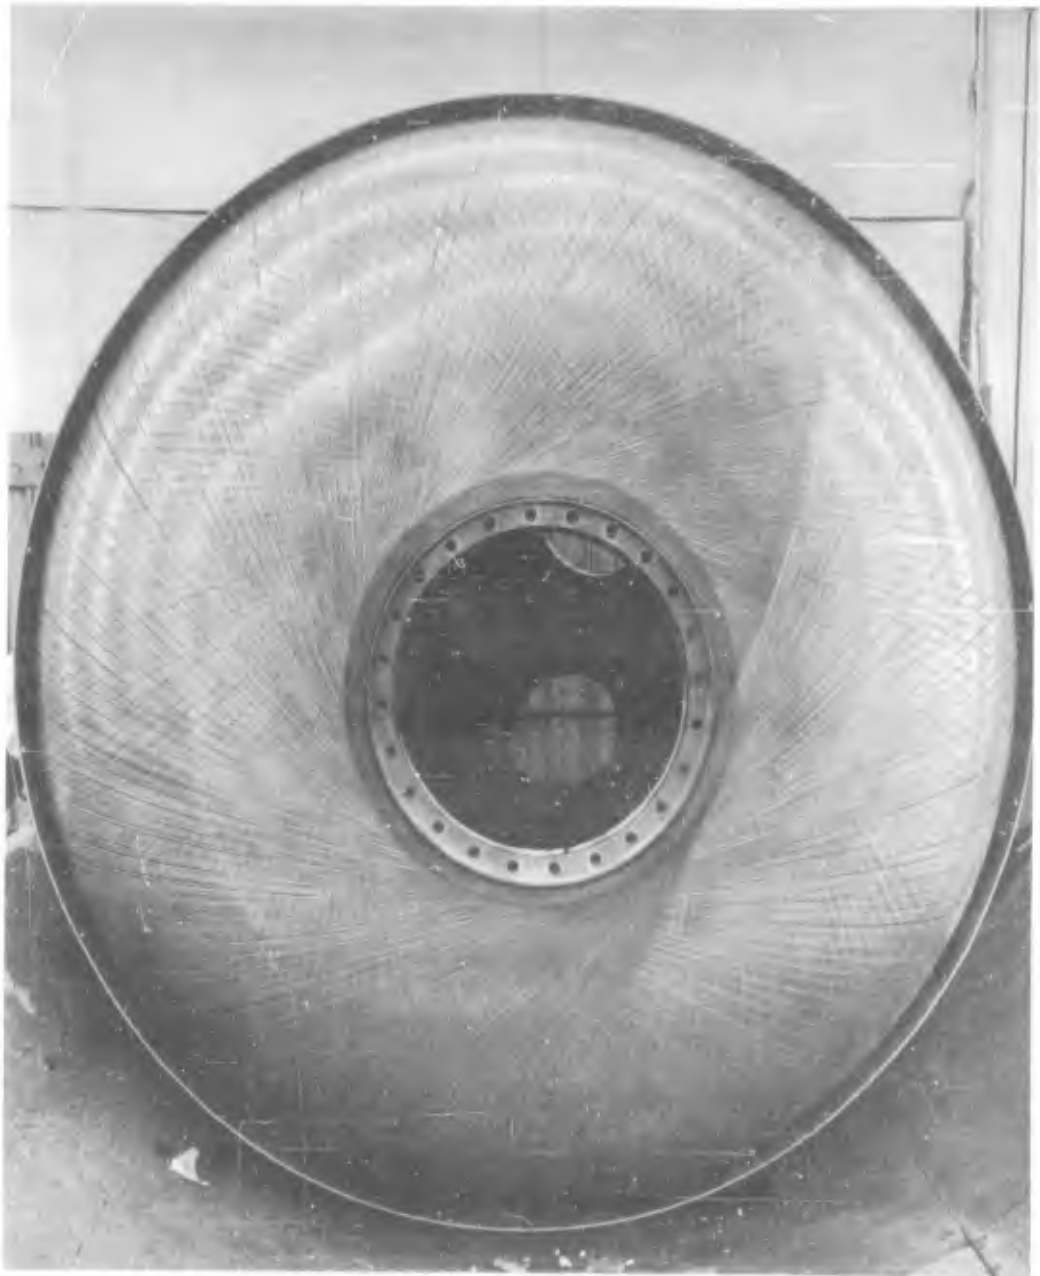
Serial No. 3, 44.3-Inch Chamber, Overall View of Forward Head
